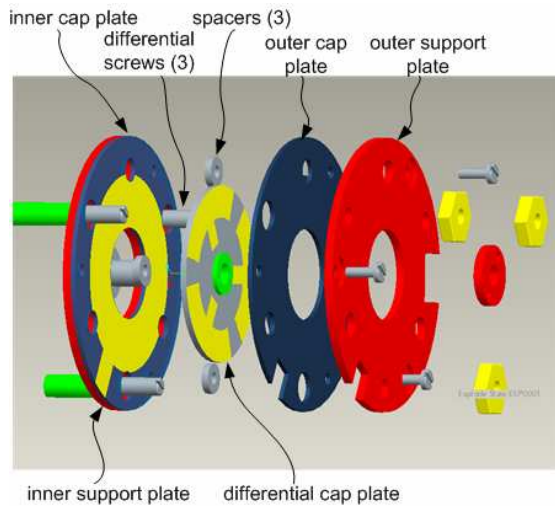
Exploded assembly drawing of the differential capacitance gage — the fine-motion position sensor.
